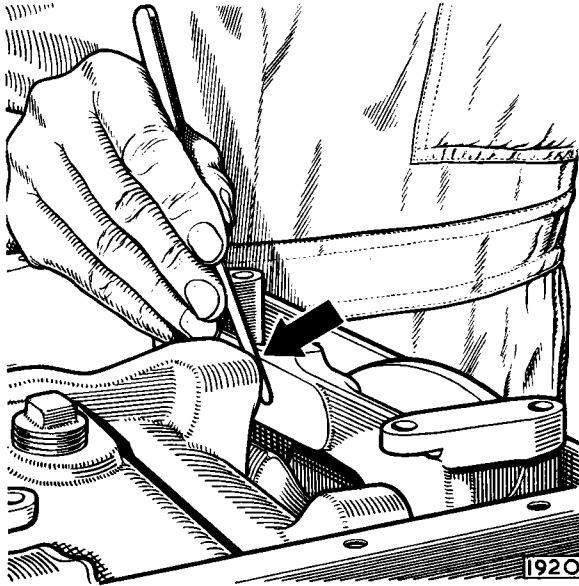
Measuring the clearance between the inner fulcrum mounting bracket and the differential casing
